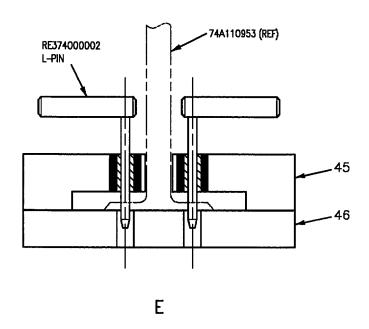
Drilling Holes in 74A110953 Hinge Half Assembly (Sheet 3)
